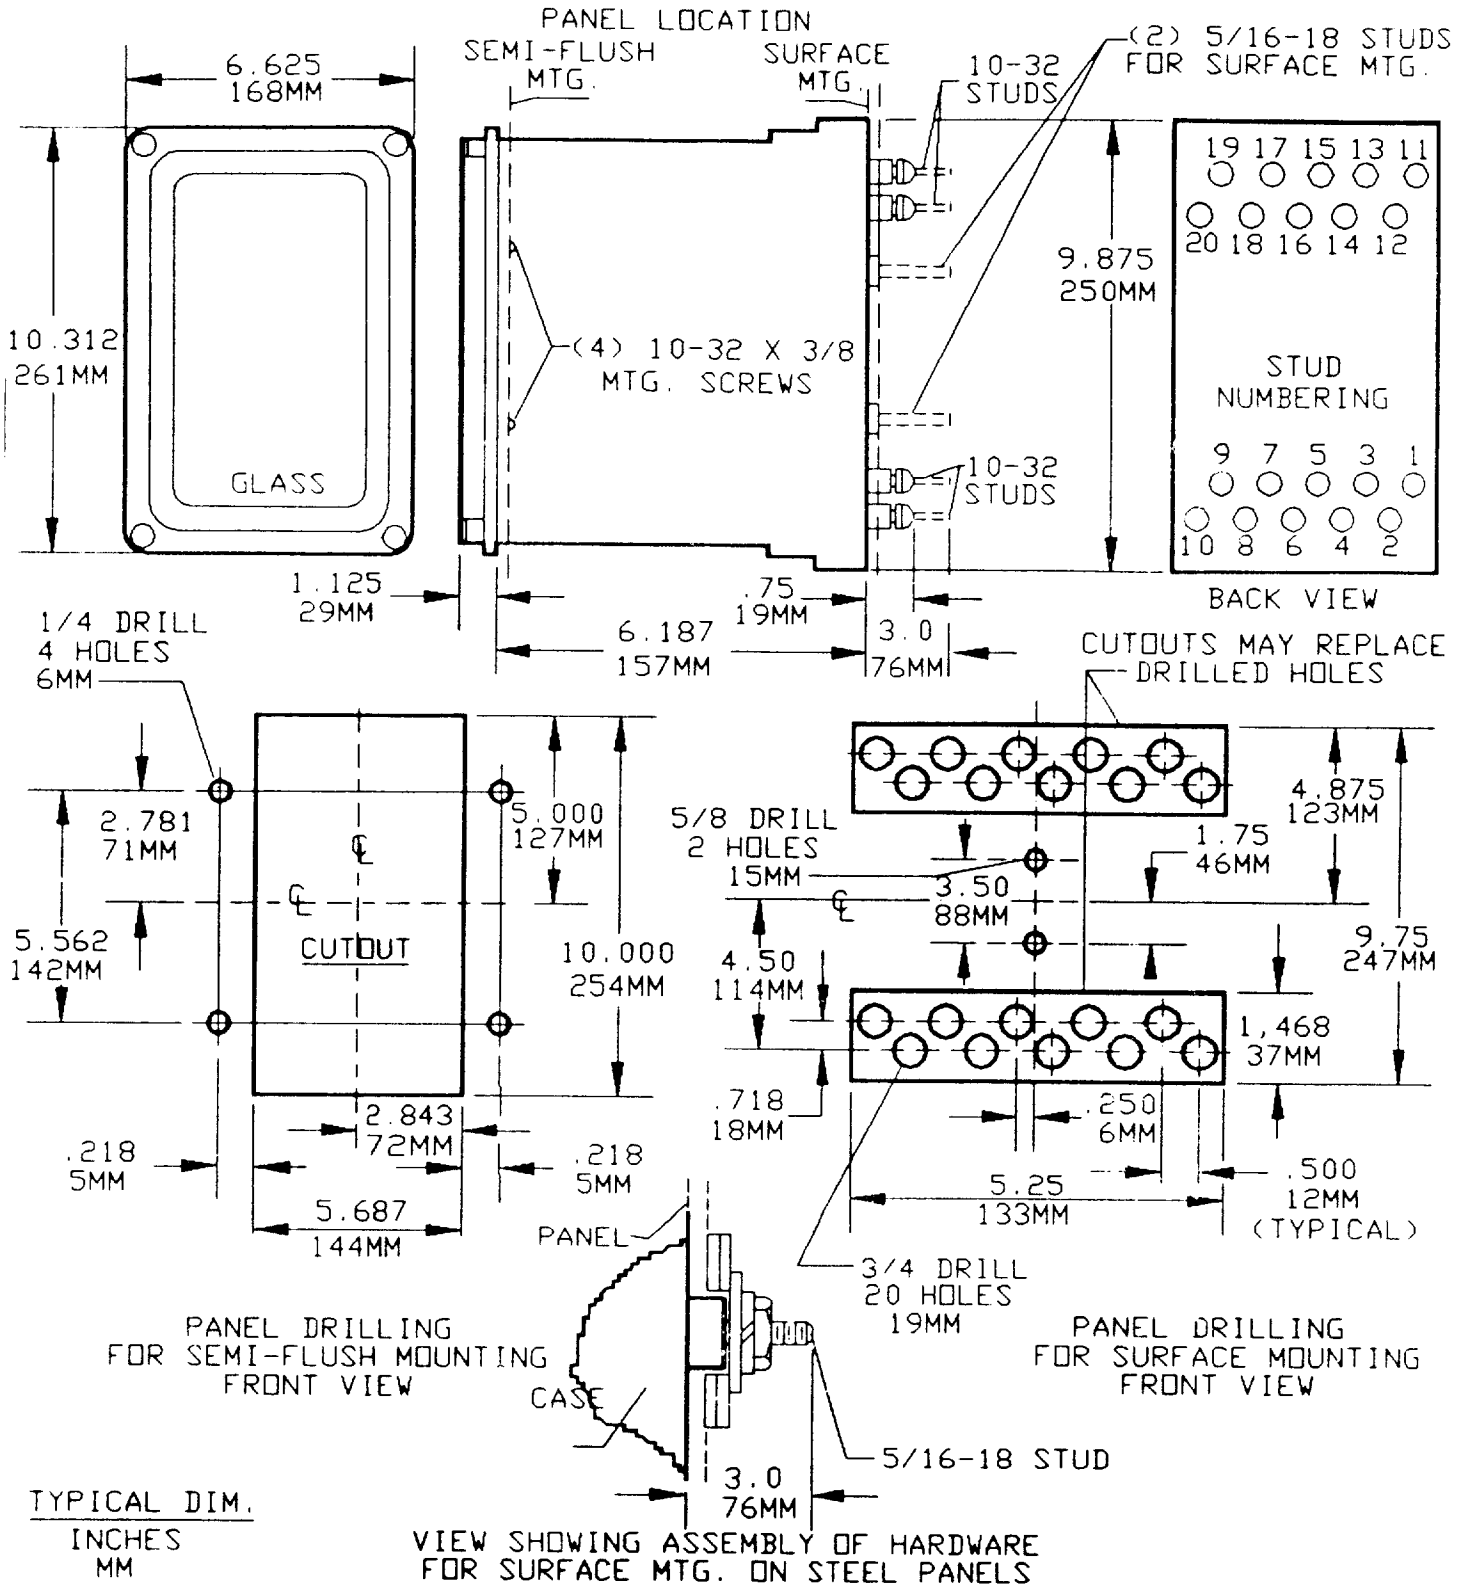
(6209272 [7]) Outline and Panel Drilling Dimensions for Type HGA18N Relay
